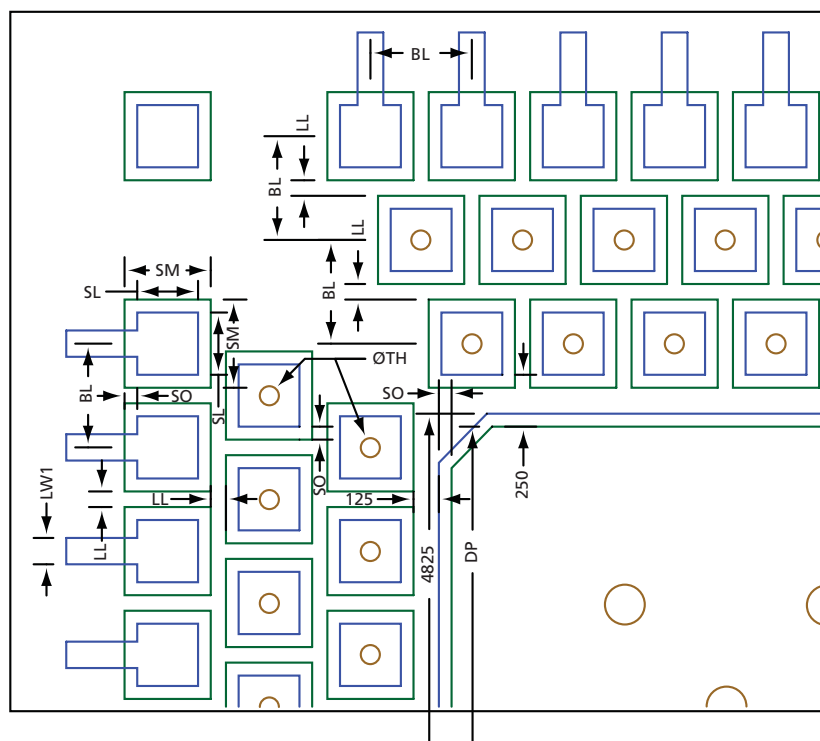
• Soldered Pads for QFN Package (PCB top layer)
